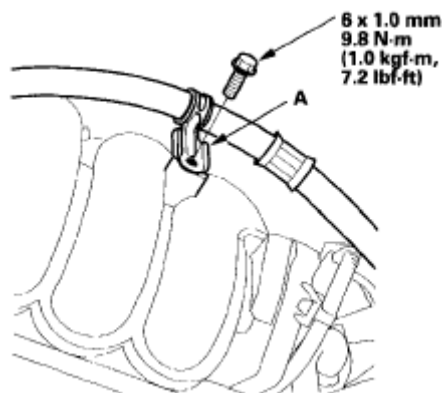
Identifying Pump Outlet Hose Clamp (With Torque Specifications)
